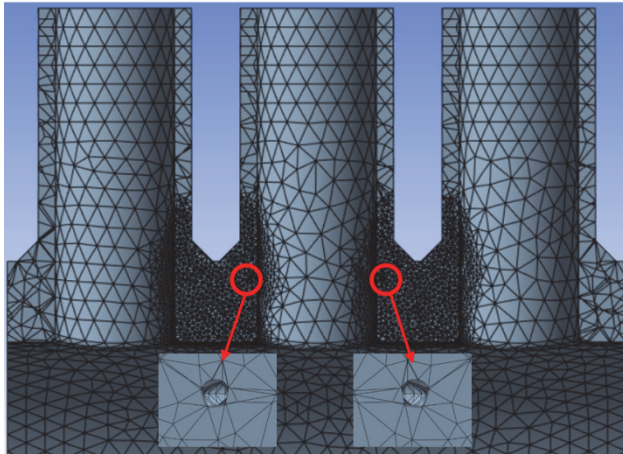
Model with torus shape flaw along whole circumference of weld
